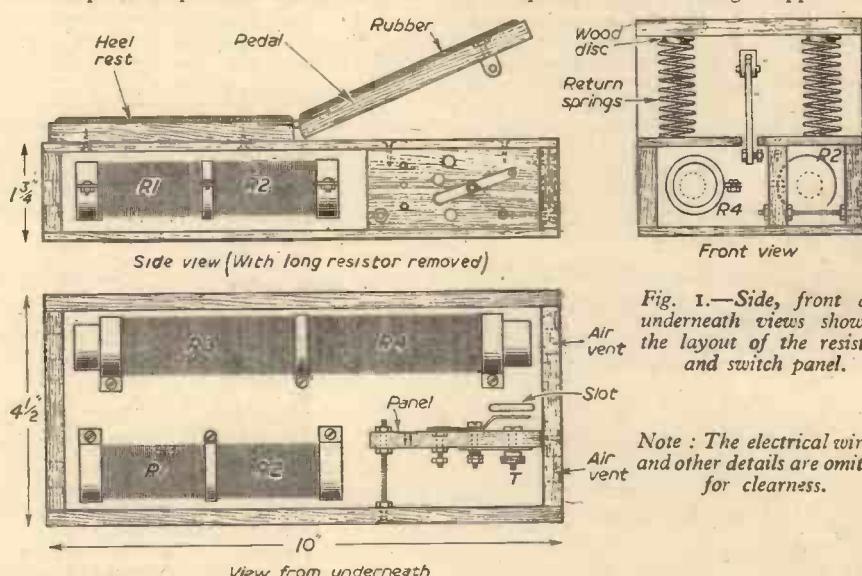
Side, front and underneath views showing the layout of the resistors and switch panel.
